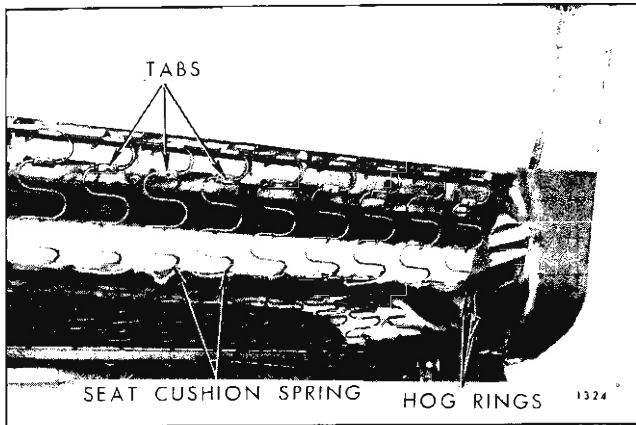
H2—Front Seat Cushion-To-Seat Back Spring Attachment
